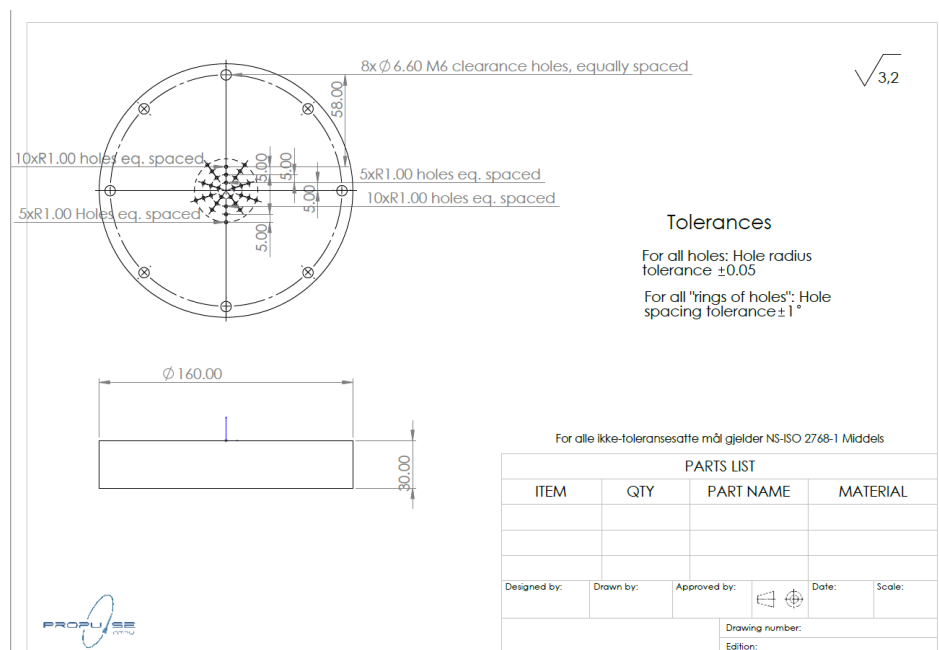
Machine drawings of injector 1. All dimensions in mm. Note that the thickness is actually 15mm, not 30mm
